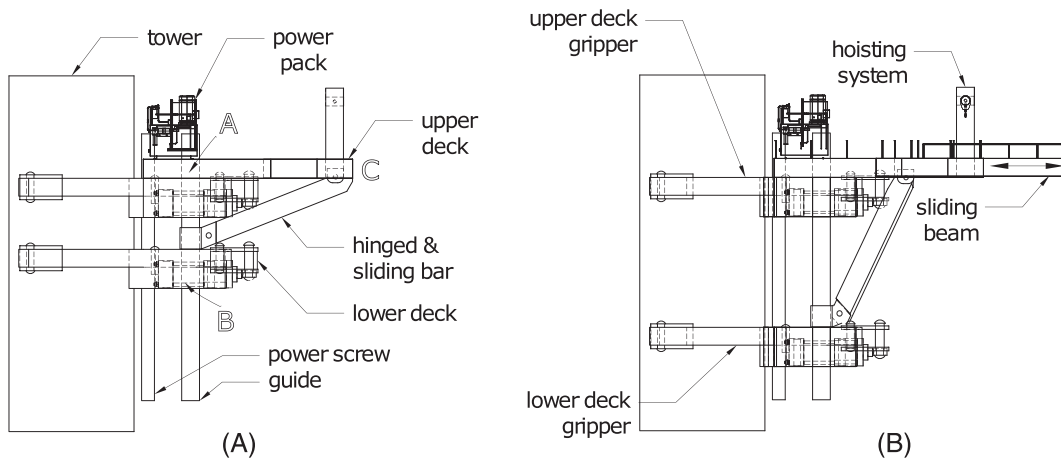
Side view of the tower climbing mechanism. A, Retracted condition; B, extended condition
